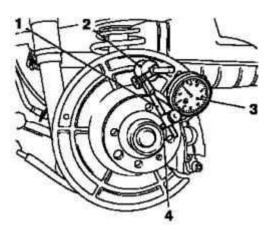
Measurement of lateral runout: 1 - Bracket 2 - magnetic holder, 3 - a special tool, 4 - sensor type indicator time
